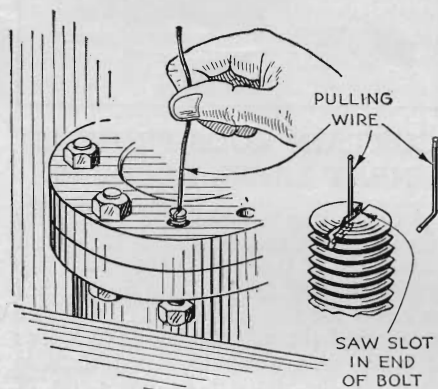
To pull bolts into cramped quarters, set wire in slot in bolt and thread through hole
